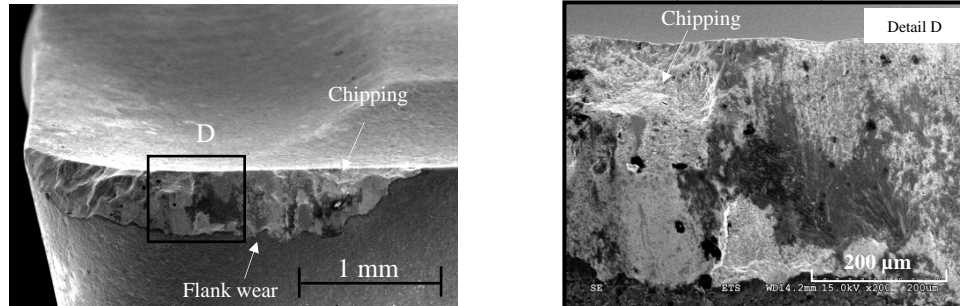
SEM micrographs of tool wear (insert 1) after dry machining of P20-ESR at cutting speed of 100 mm/min and $t=185$ min.
